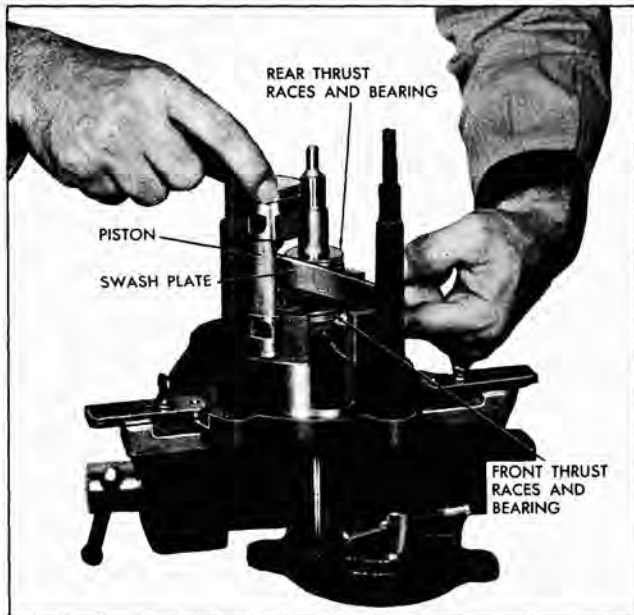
Installing Piston with Balls and Front Shoe Only
